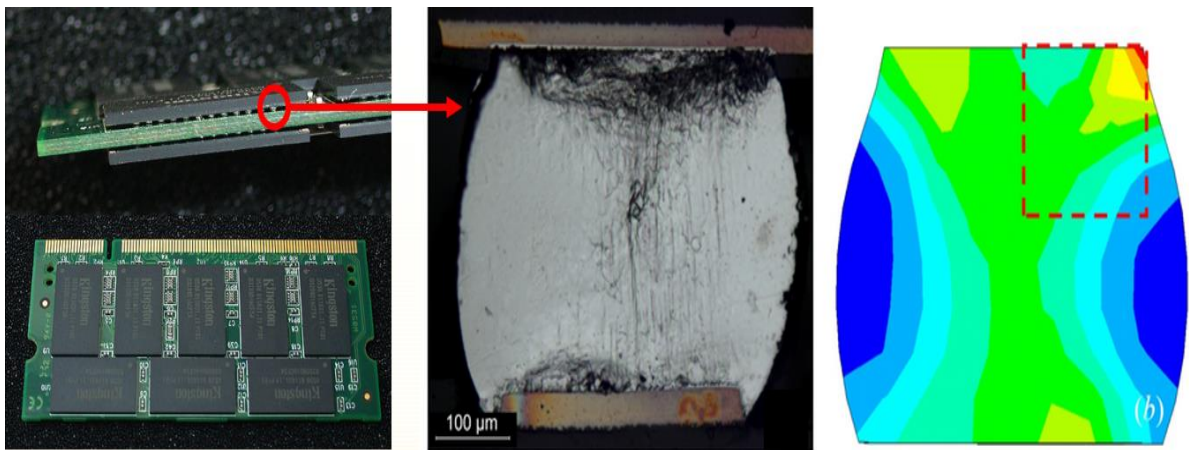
Crack Analysis of Solder Ball Joint [2]
